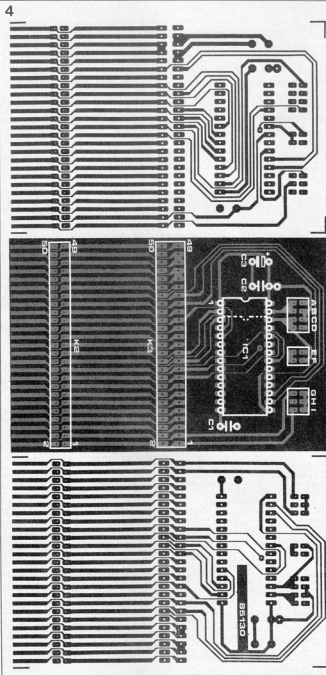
This through-plated PCB is small but effective when it comes to plugging in existing cartridges, hardware extensions, or EPROMs holding user programs.
